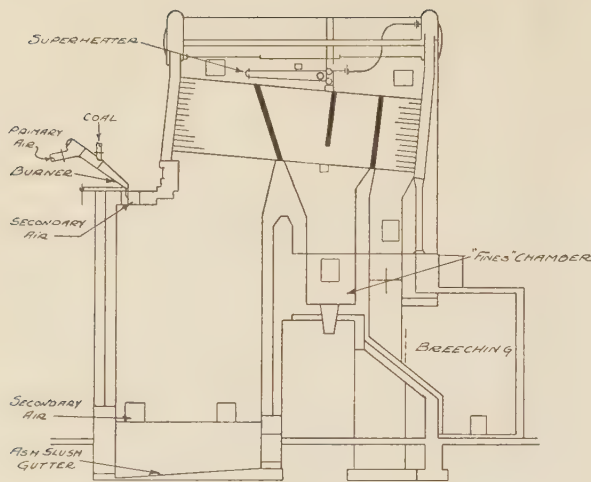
SECTIONAL ELEVATION OF EDGE MOOR FOUR-PASS BOILER FIRST USED TO BURN PULVERIZED ANTHRACITE
